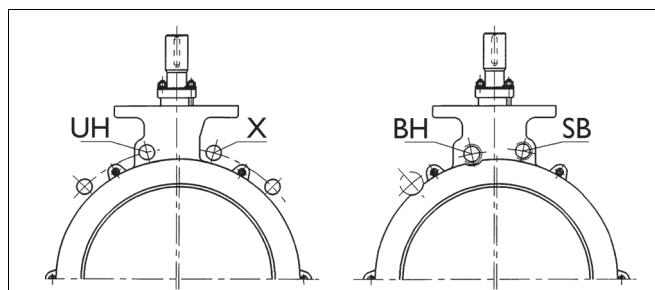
Stud bolt mounting dimensions, mounting option SB
